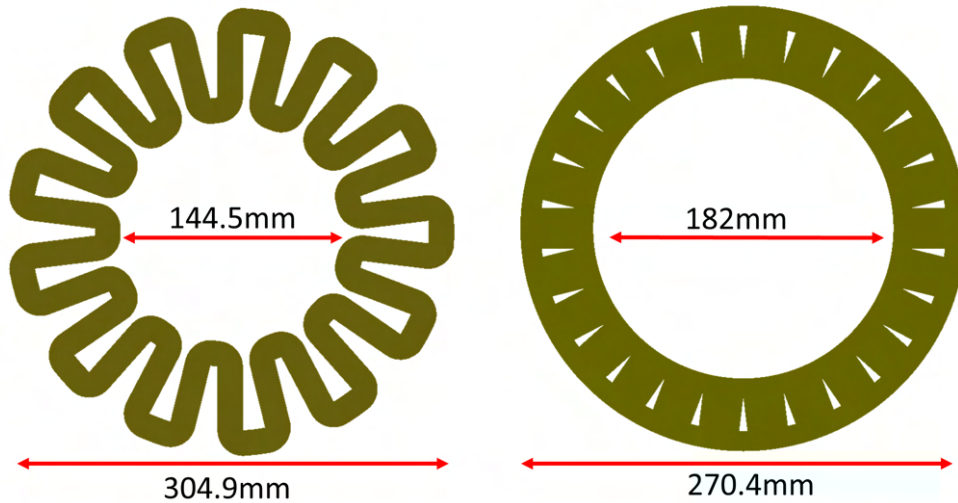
Inner and outer diameter of both proposed PCB stator windings. (left) Wave winding machine exhibits end windings past the rotor magnet OD, leading to a greater active stator OD, when compared to the spiral winding stator (right).
